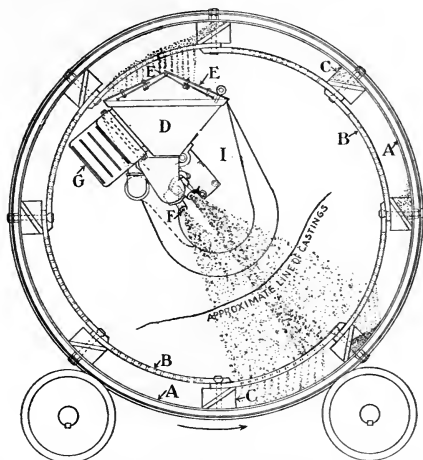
A—FRONT VIEW, SHOWING DETAILS OF SAND BLAST BARREL
